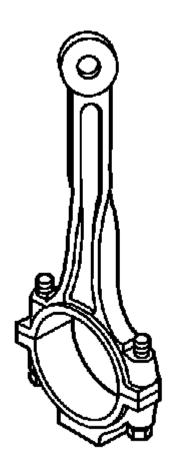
Identifying Twisted Connecting Rod Courtesy of GENERAL MOTORS CORP.
